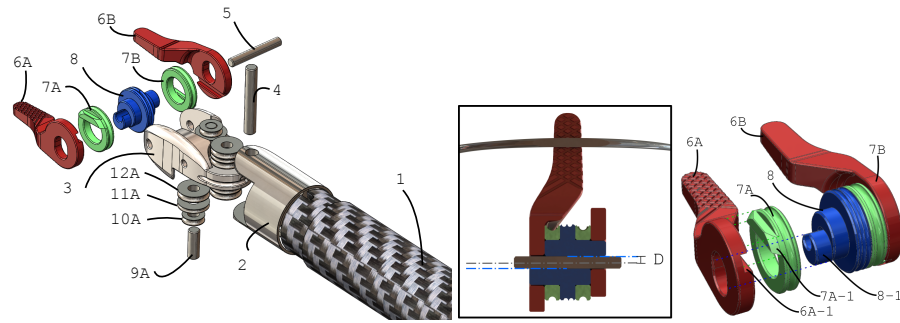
The new suturing tool: exploded view and cross section (in the frame).
